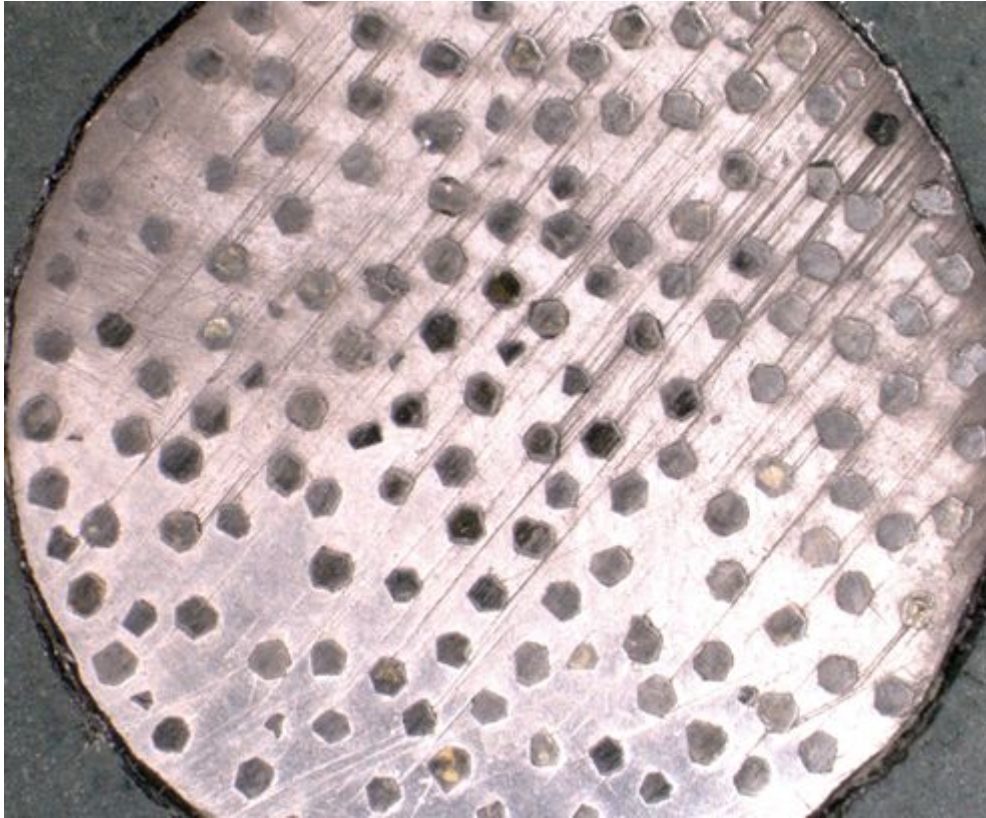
Photo shows the horizontal cross-section of an SD-BP DTM insert.
